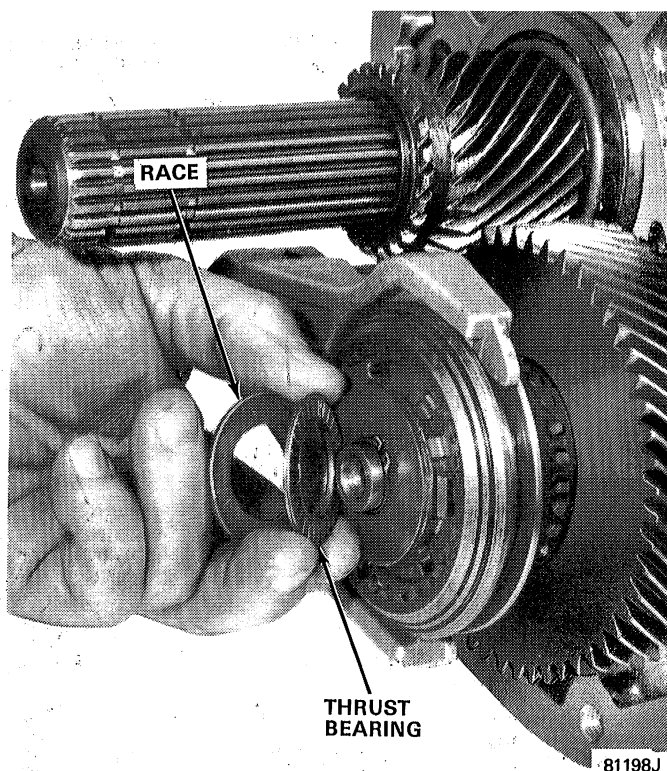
B-41 Countershaft Thrust Bearing and Race Removal/Installation
